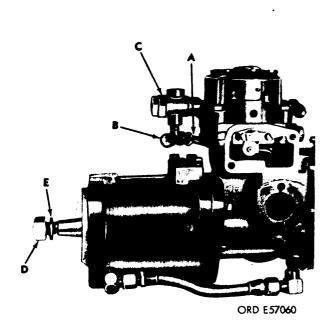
Removing overflow valve assembly (all pumps except early code G).
